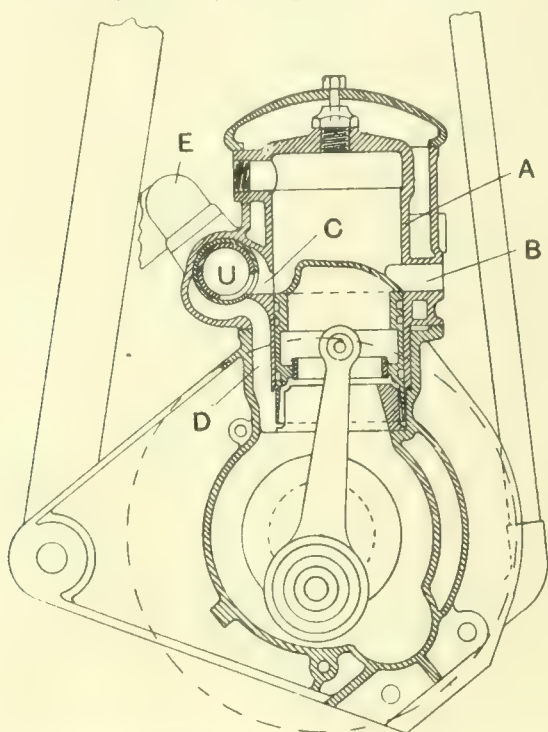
INTERNAL-COMBUSTION ENGINE FITTED WITH ROTARY DISTRIBUTING VALVE.
